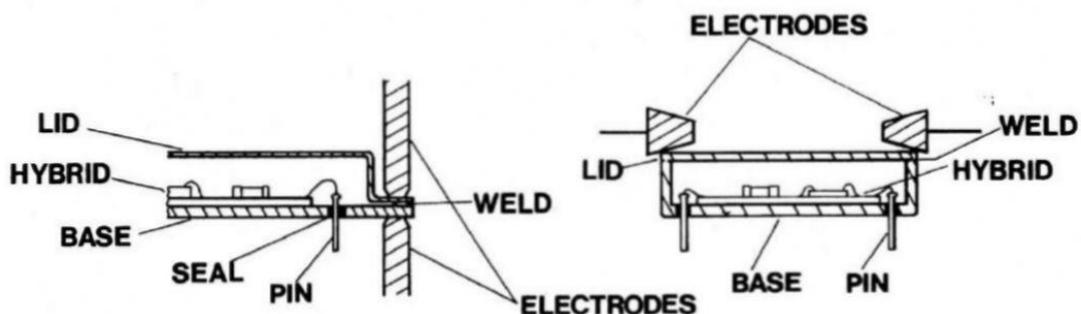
Projection and seam welding of hermetically-sealed packages
